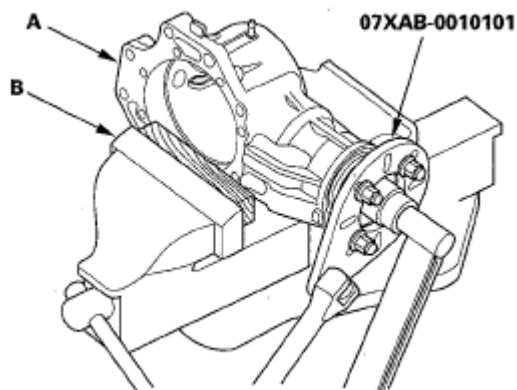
Identifying Transfer Housing In Bench Vise With Companion Flange Holder
